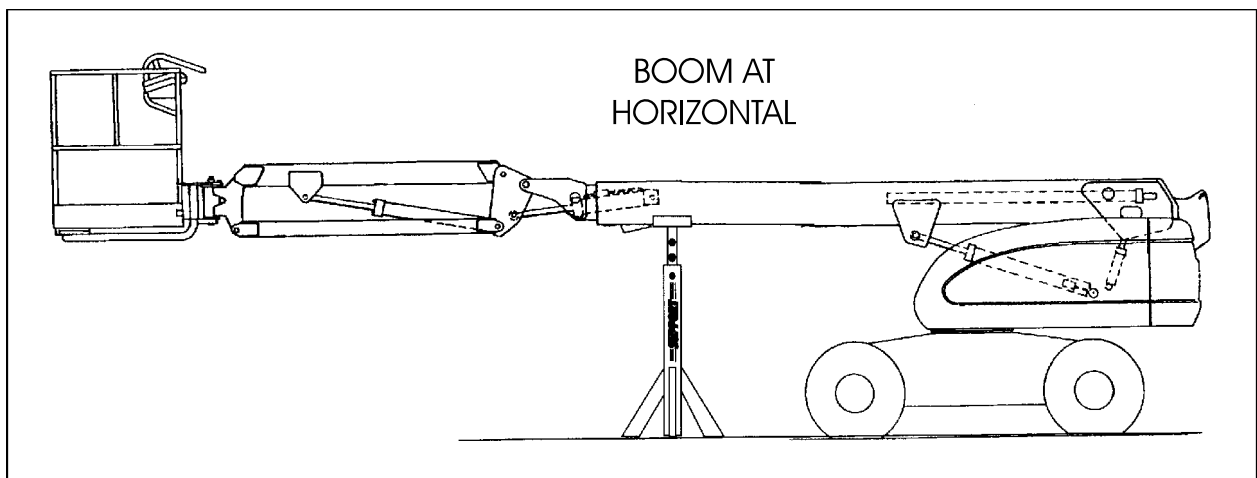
Boom Positioning and Support, Cylinder Repair
